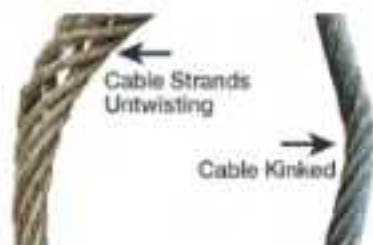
Cable Strands Untwisting and Cable Kinked
